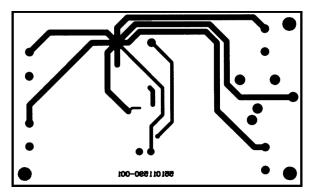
Recommended NGL0008B PC Board Layout Bottom-Side Layout
